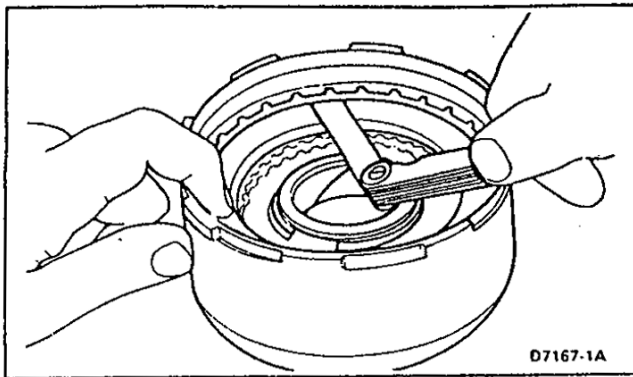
Checking Reverse-High Clutch Snap Ring Clearance
